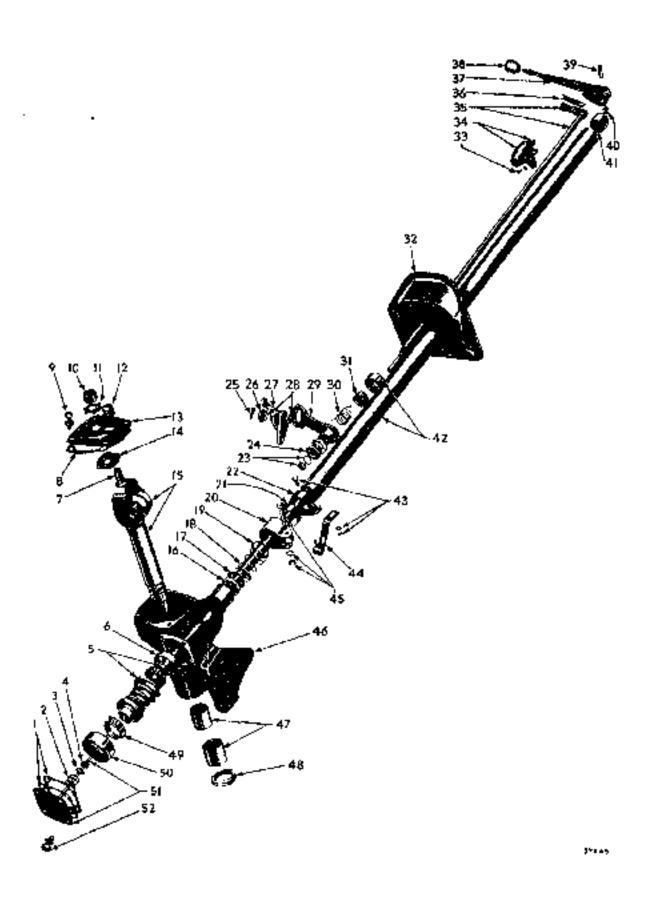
Steering Gear (Disassembled View) (1942 Model, Typical of 1941 Model)
